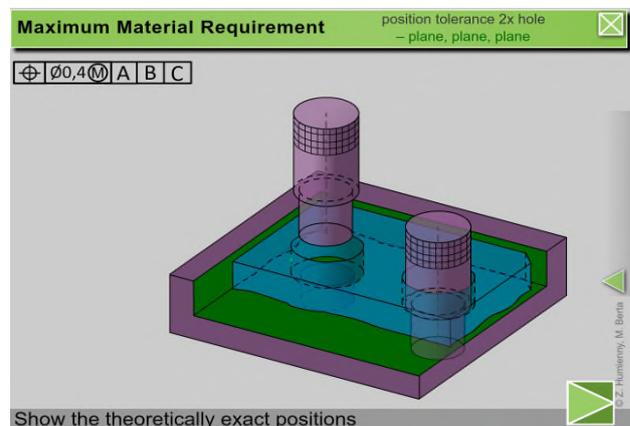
The last but one scene developed to explain position tolerance with MMR for pattern of two holes. The plate is fixed in the datum system. The position of the first hole is verified as OK. The second pin is used to verify whether the second hole is in the correct position.
